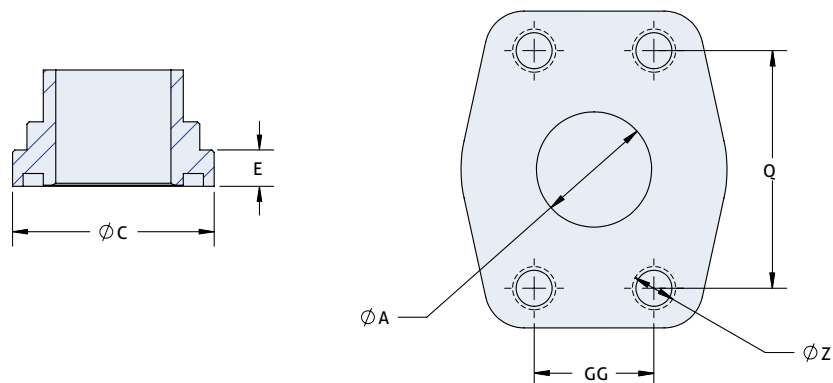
Code 61 and 62 Figures of the flange (Left) and bolt pattern (Right)
